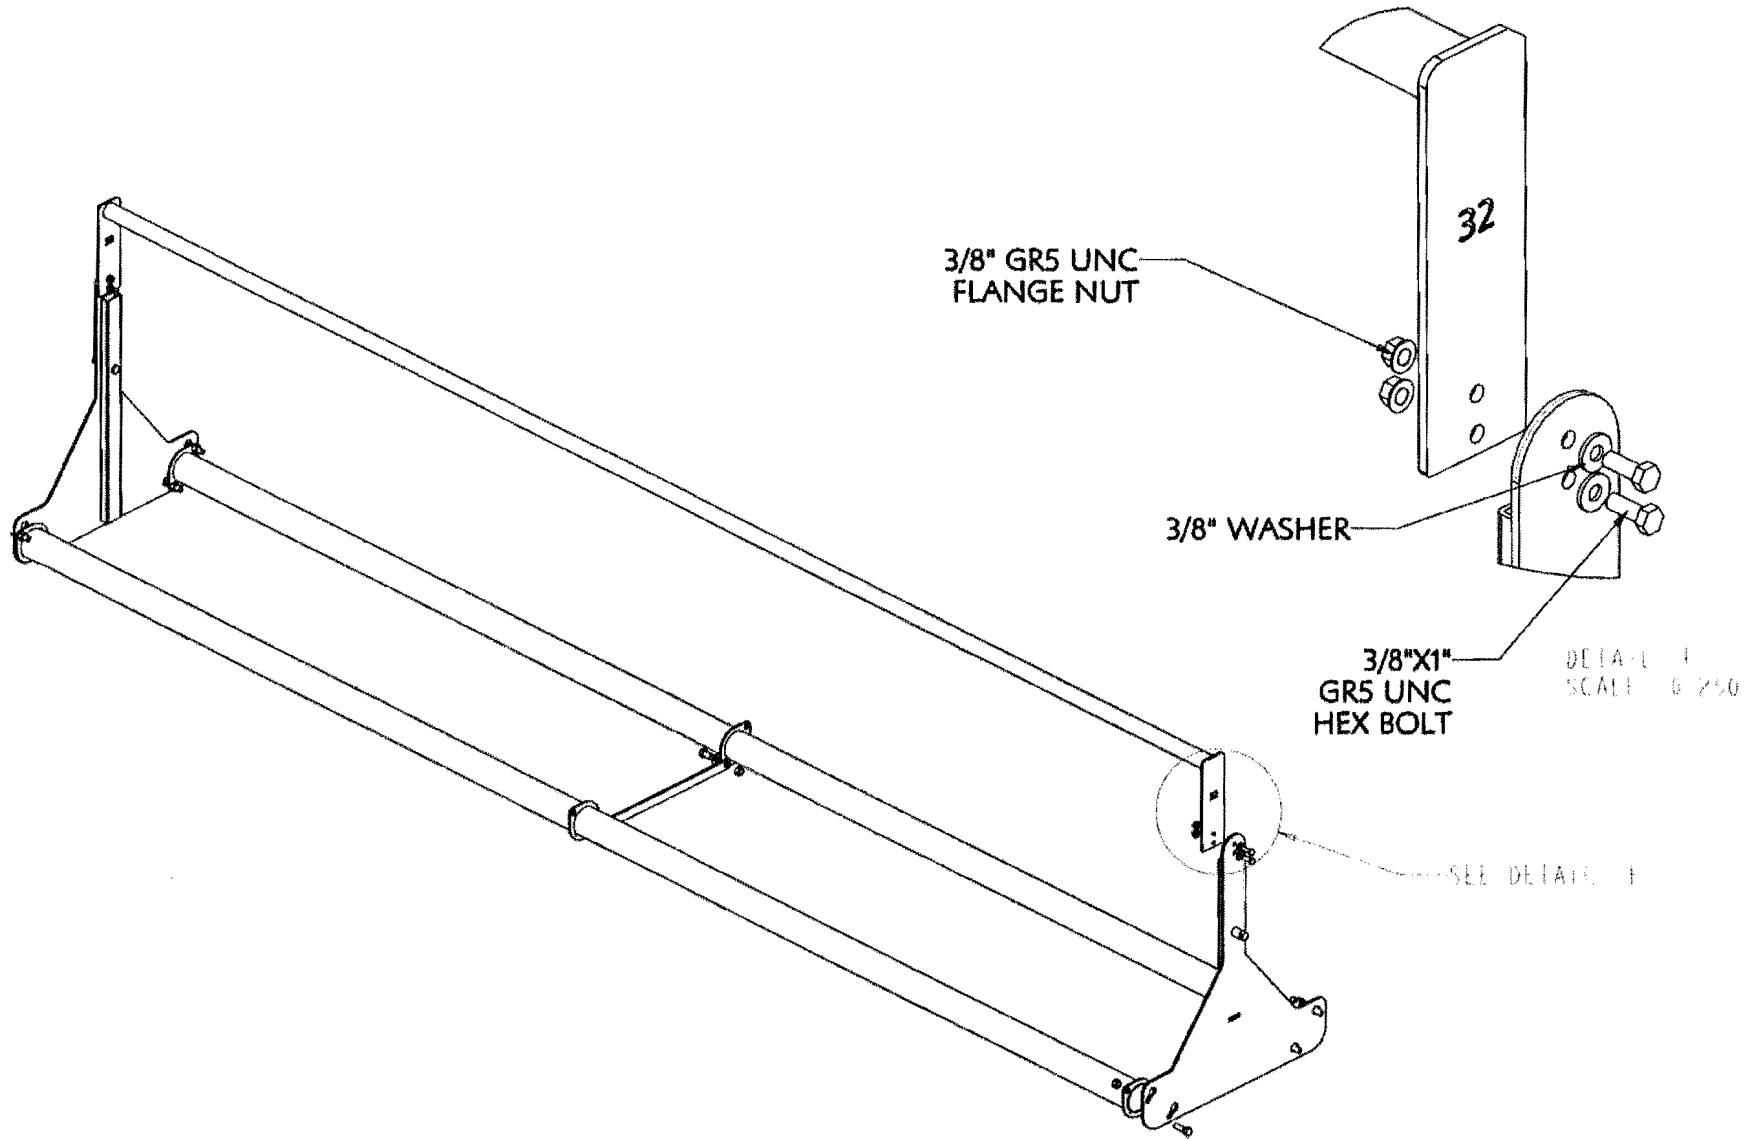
HEAVY DUTY TIRE CARRIER ASSEMBLY
